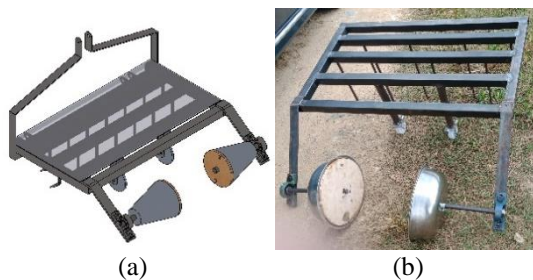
(a) : CAD model for multipurpose corn seed sowing jig (b) : Prototype of multipurpose corn seed sowing jig
